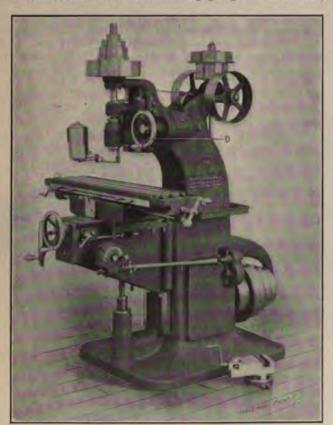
Brown & Sharpe Vertical Milling Machine.
